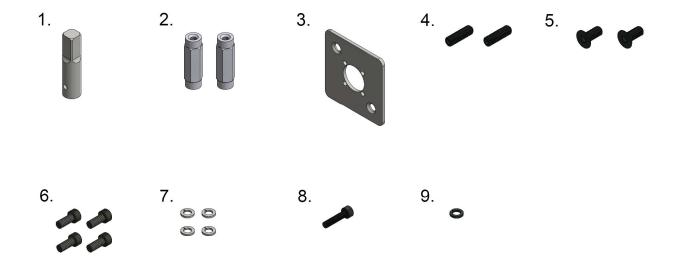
Pieces Supplied with the AGA93.7 Bracket Kit
